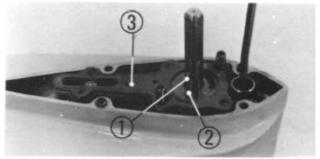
① Impeller key ② Pump gasket ② Impeller cover
